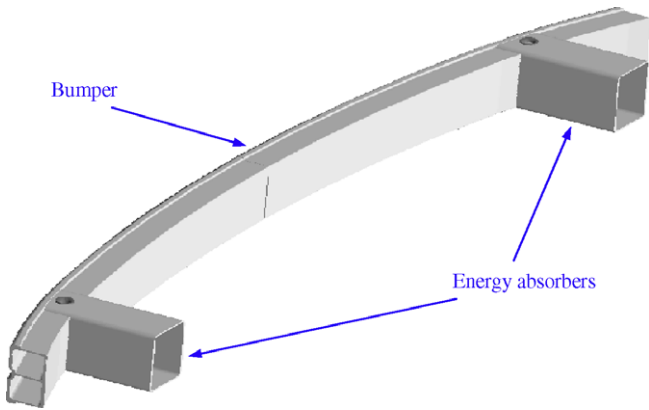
Example of typical bumper beam and tubular front rail assembly [2].
